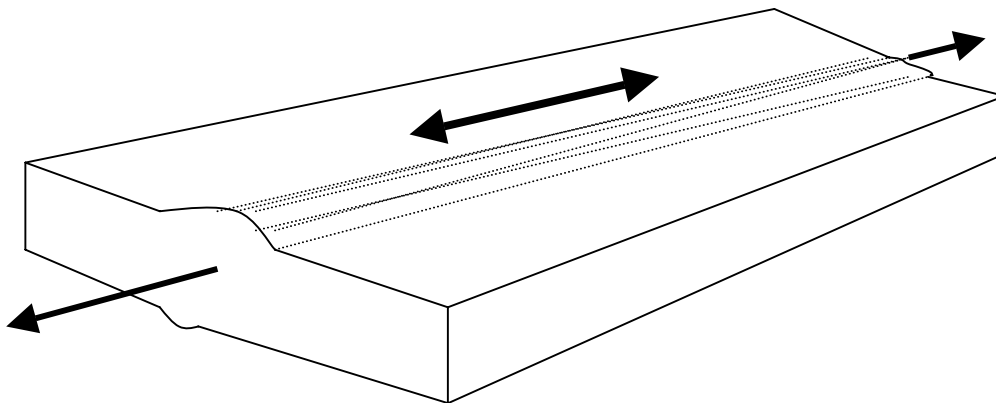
Grinding marks parallel to direction of cyclic loading – stop/starts and weld ripples removed.
